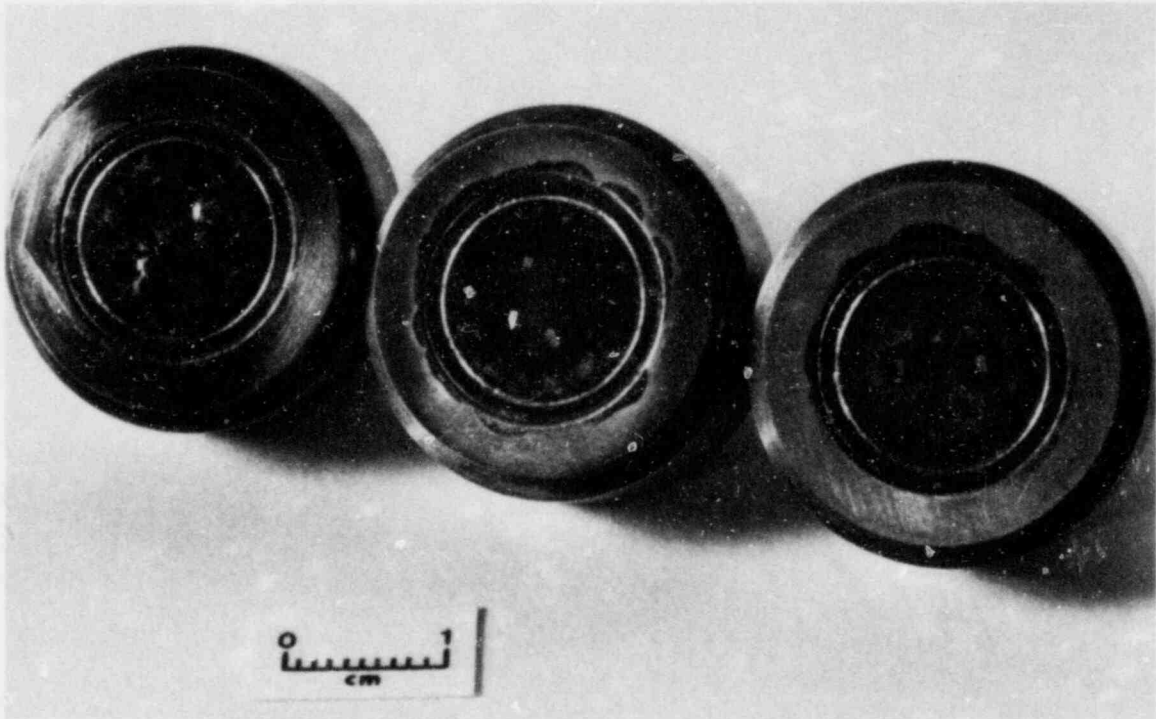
Steps in fabrication of film sensor having 49% Ti-49% Cu-2% Be brazing filler metal electrodes outlined by ultrasonically machined impression. Left, as brazed. Center, after surface is sanded smooth. Right, after filler metal has been removed leaving two D-shaped electrodes.
